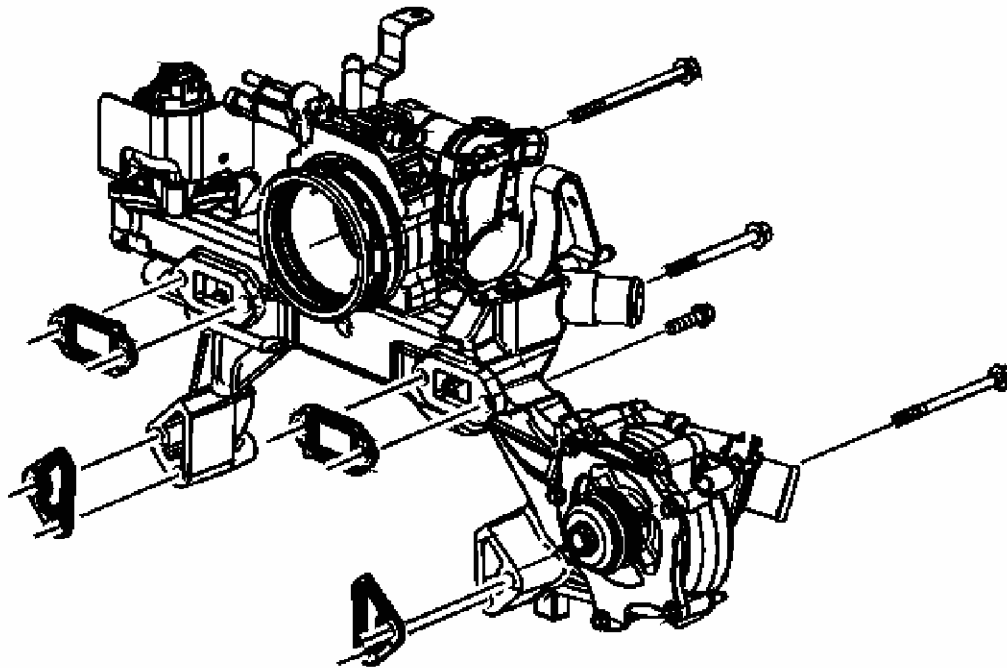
View Of Water Pump Housing Gaskets & Bolts
